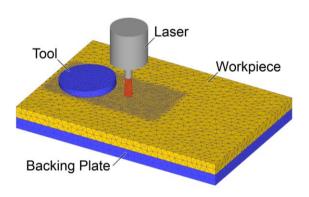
The meshed FE model showing the tool, workpiece, and backing plate (under the workpiece). Shown superimposed is a rendering of the in-process laser source.
